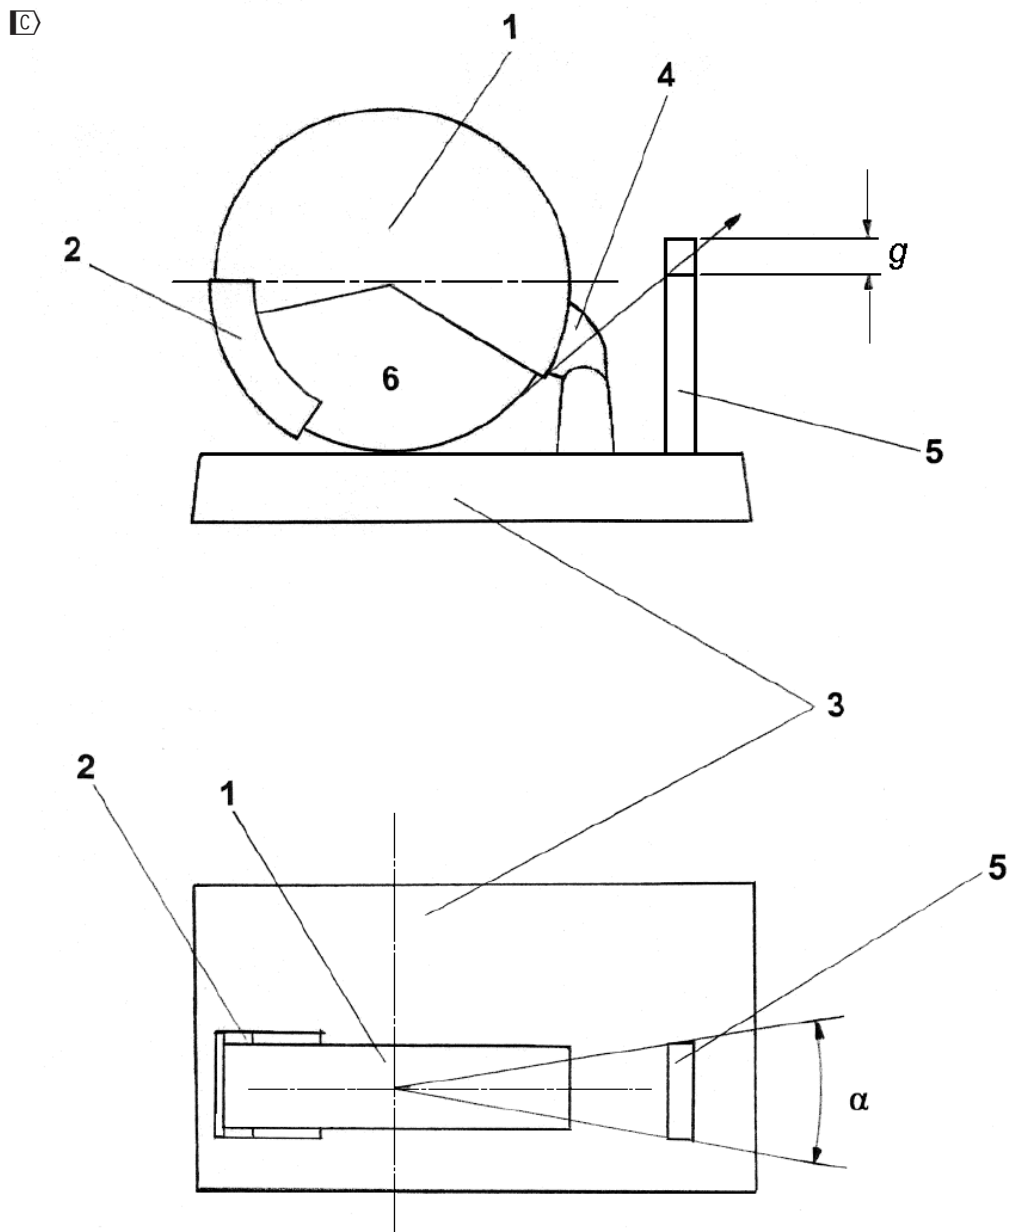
Guard arrangement with cutting unit in rest position
